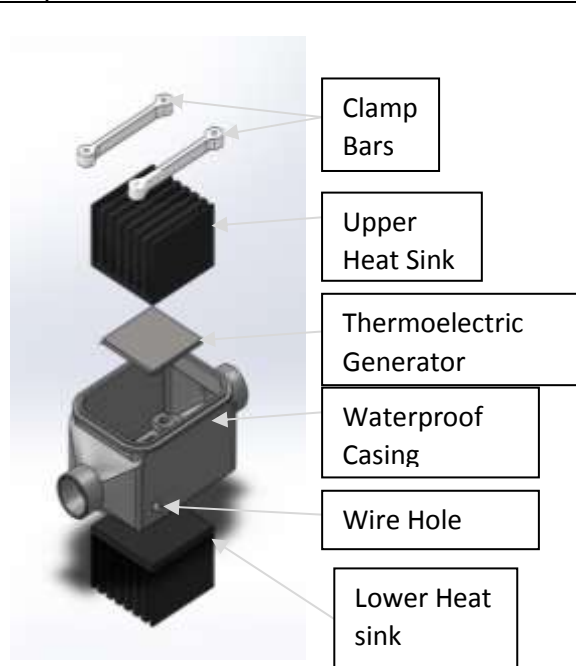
EXPLODED VIEW OF PROTOTYPE
